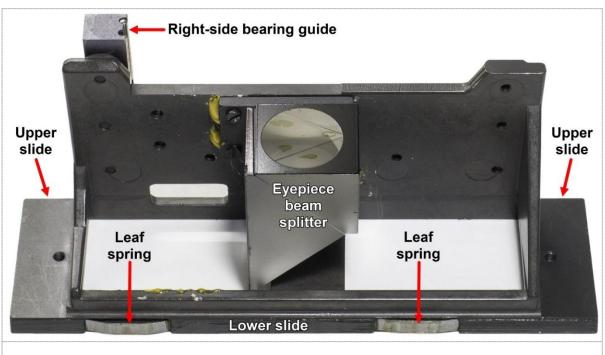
The head front viewed obliquely from the backside after the eyepiece slides have been removed.
